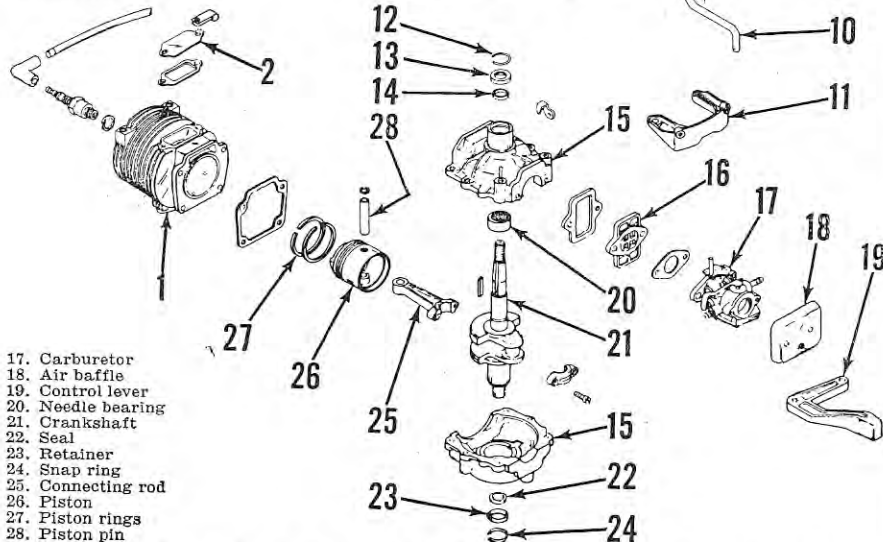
Exploded view of late, Model V51 power head especially designed for outboard motor application.
